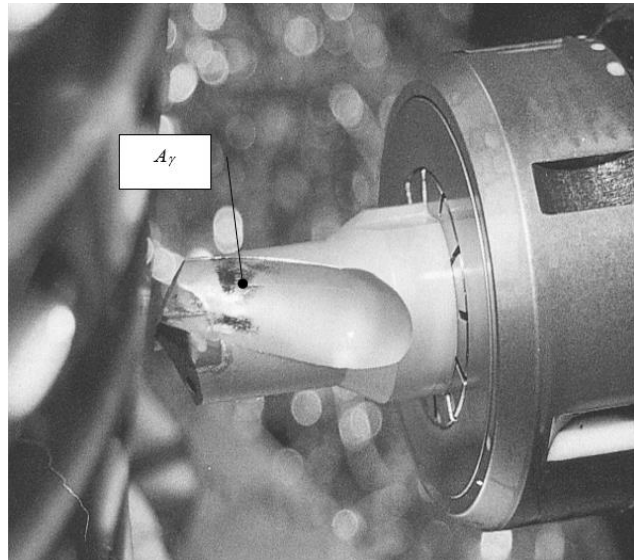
The abrasive mechanism the grinding flank surface of the helical drill.
